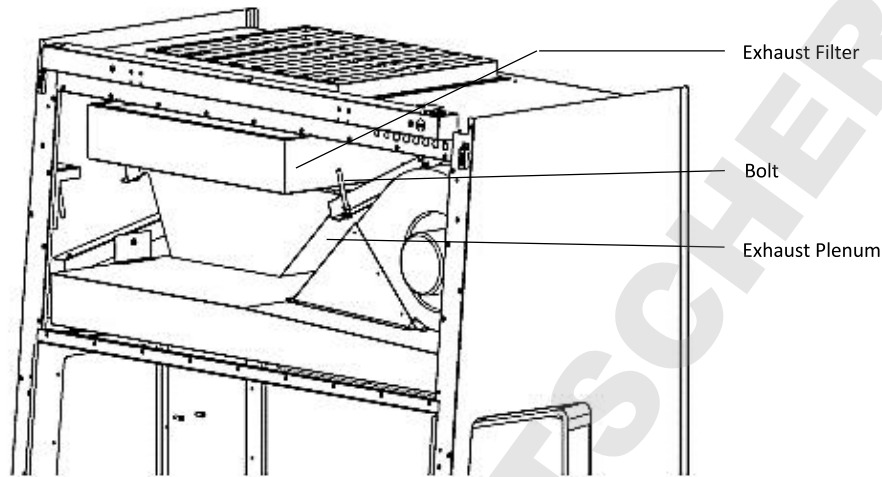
Unbolting the exhaust plenum to remove exhaust filter
